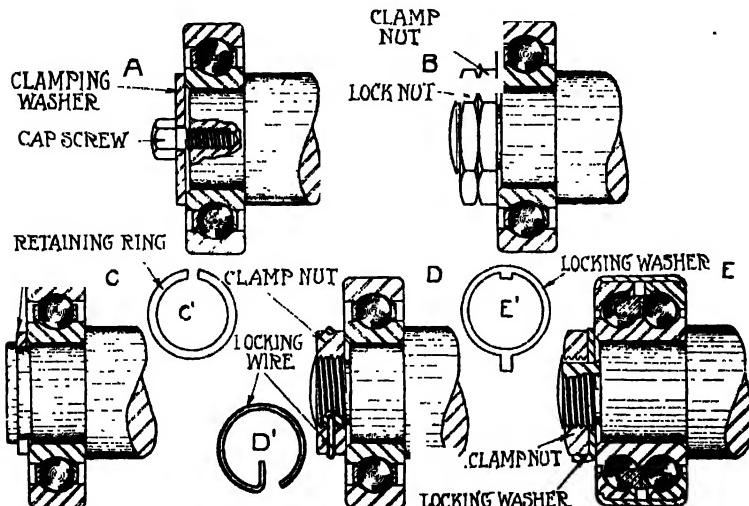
Conventional Methods of Retaining Ball Bearing Inner Races on Sliding Gearset Countershaft.
